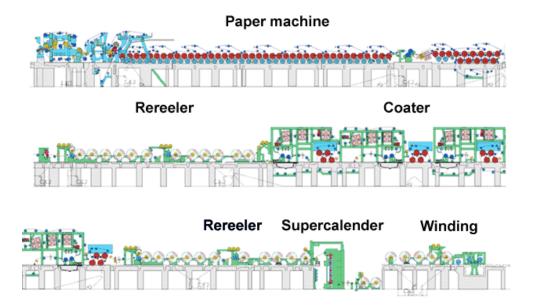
Coating fine paper machine (Knowpap, paper and board production)
